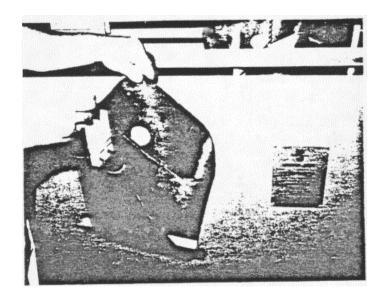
Positioning of Insulated Sleeve Pins for testing with Hammock method of Suspension
